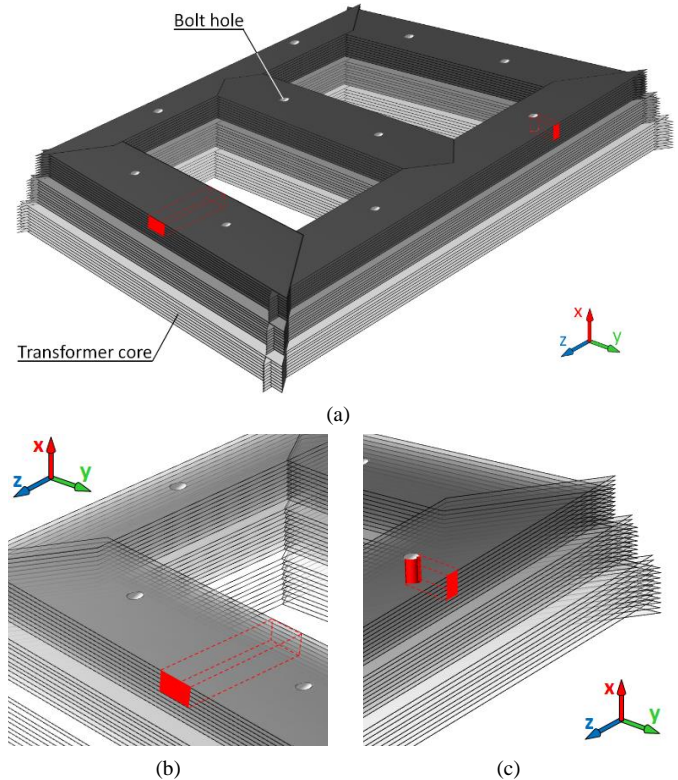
Perspective view of a three-phase three-limb transformer core with ILFs (a) Overall view (b) ILF between bolt hole and yoke and (c) ILF on two sides of the limb
